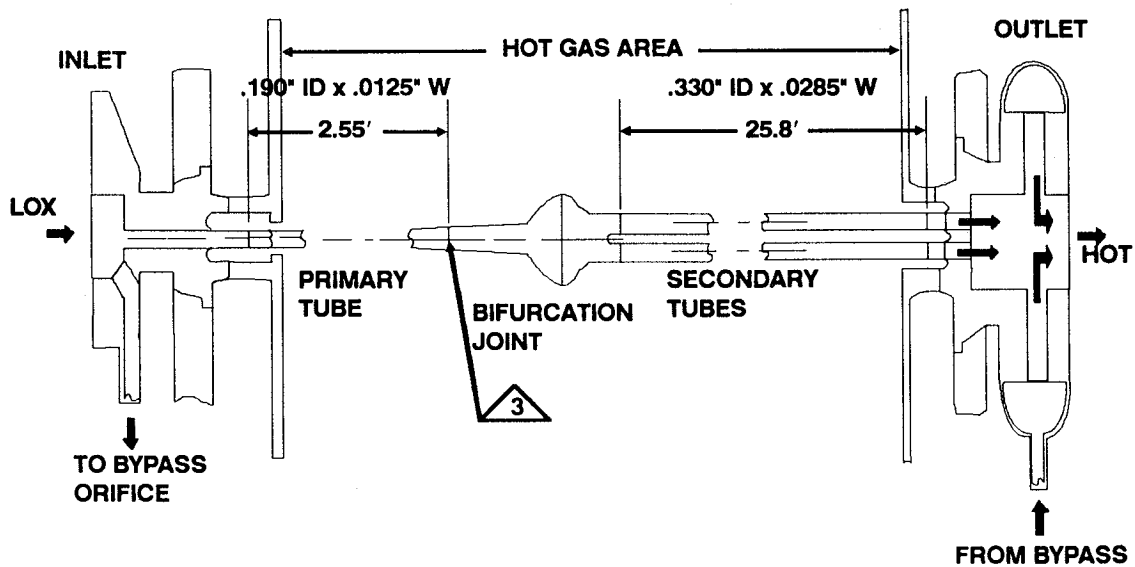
Detail of the HPOTP Heat Exchanger Coil Near Weld 3
